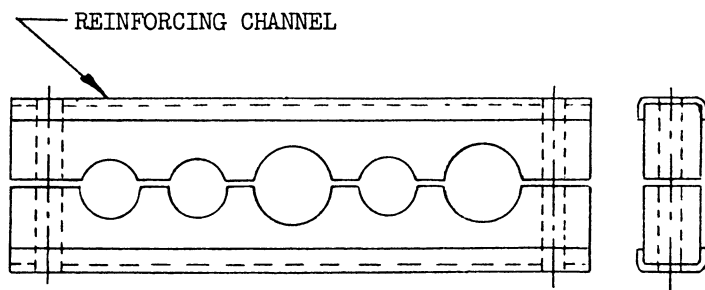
SUPPORT BLOCK CONFIGURATION
